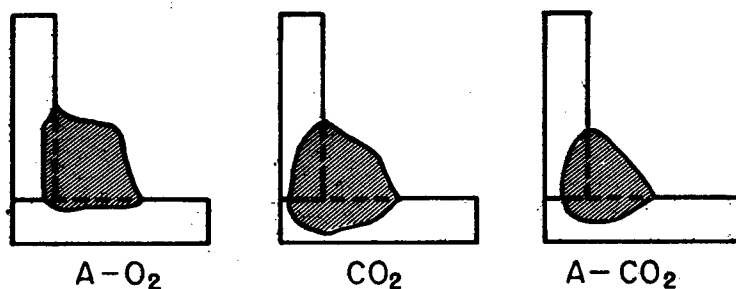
CROSS-SECTION SKETCHES OF FILLET WELDS MADE WITH DIFFERENT SHIELDING GASES AND THE SHORT-CIRCUITING ARC TECHNIQUE
